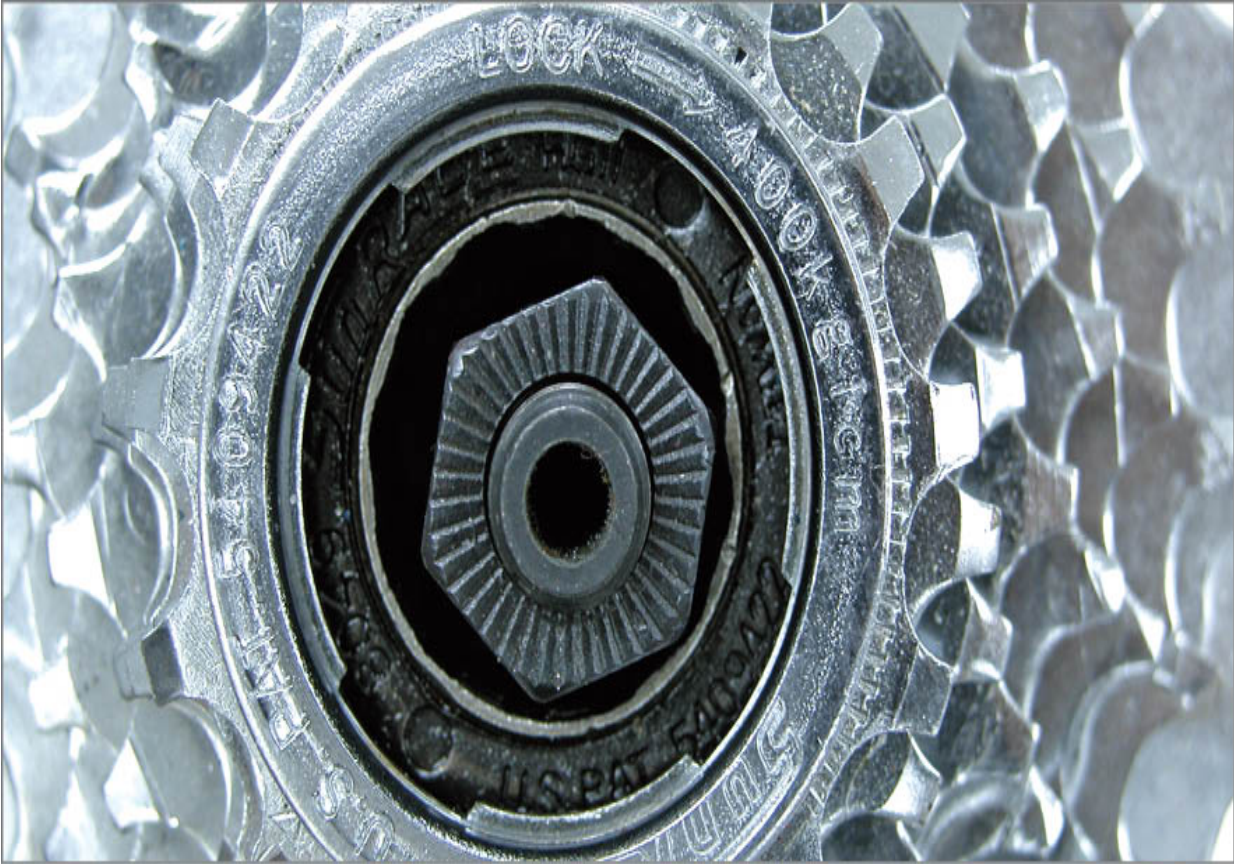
Example of off-center freewheel from cross-threading on hub
